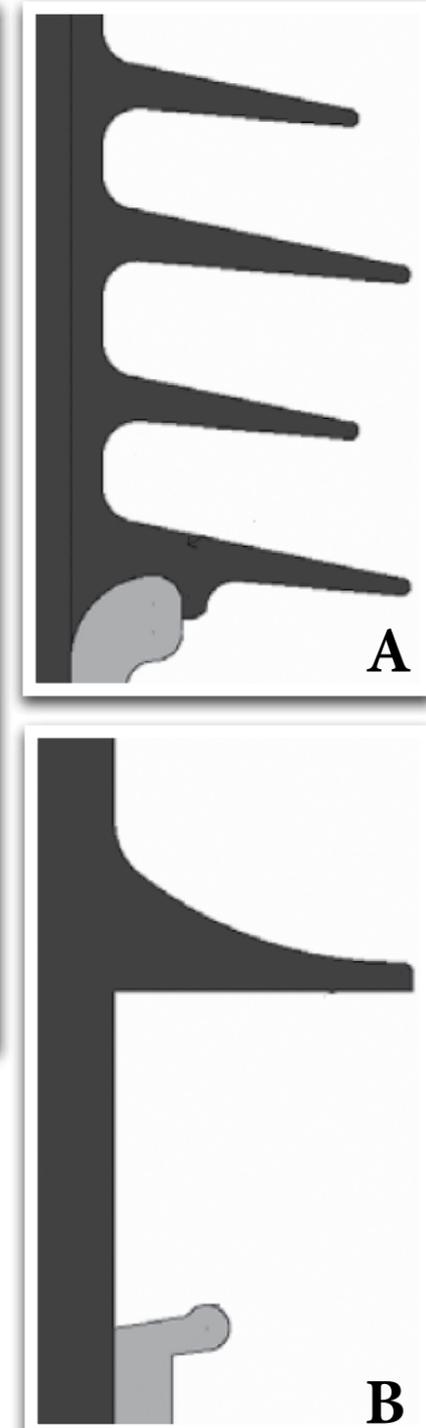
Over moulded end fitting to insulator body design (a) and sheath extruded rod crimped to end fitting design (b).
